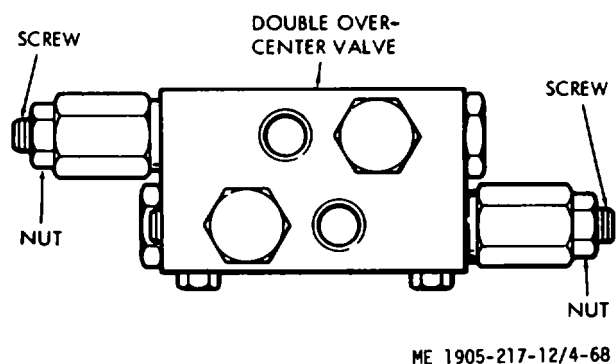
Double over-center valves, steering system, hull numbers 8500 thru 8519.
